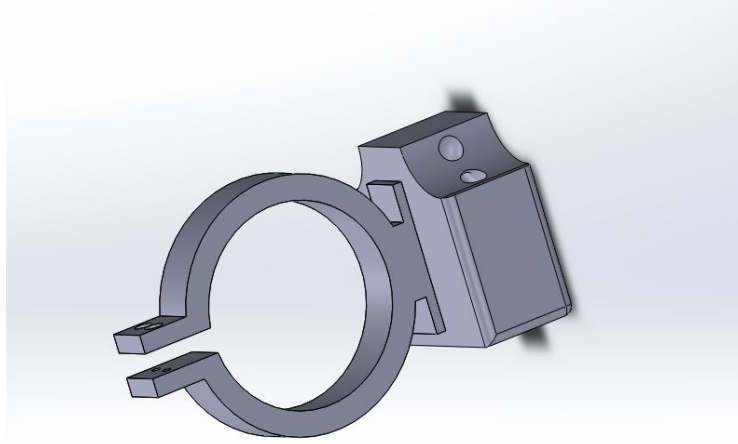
Rear side of lock body demonstrating frame mount mechanism
